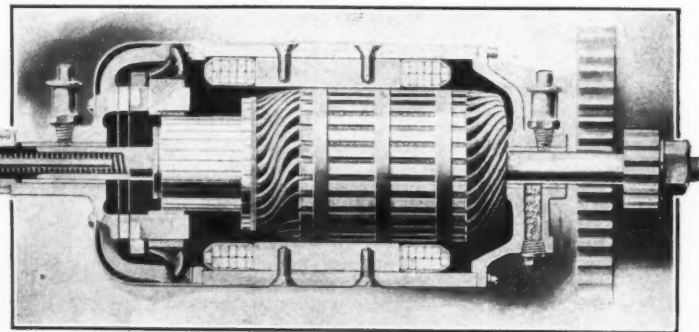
Sectional view of the Rushmore starting motor, showing the sliding pinion out of mesh and the armature displaced
